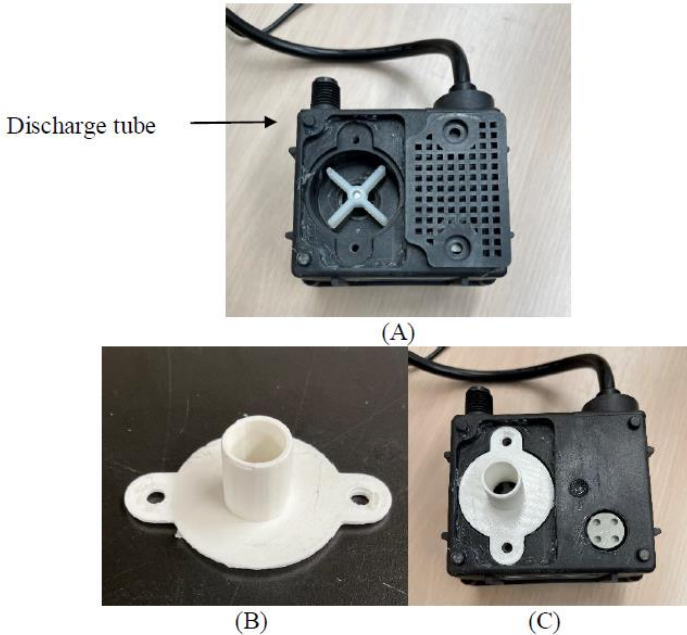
3D-printed adapter to connect a tube on the inlet side of the pump.
